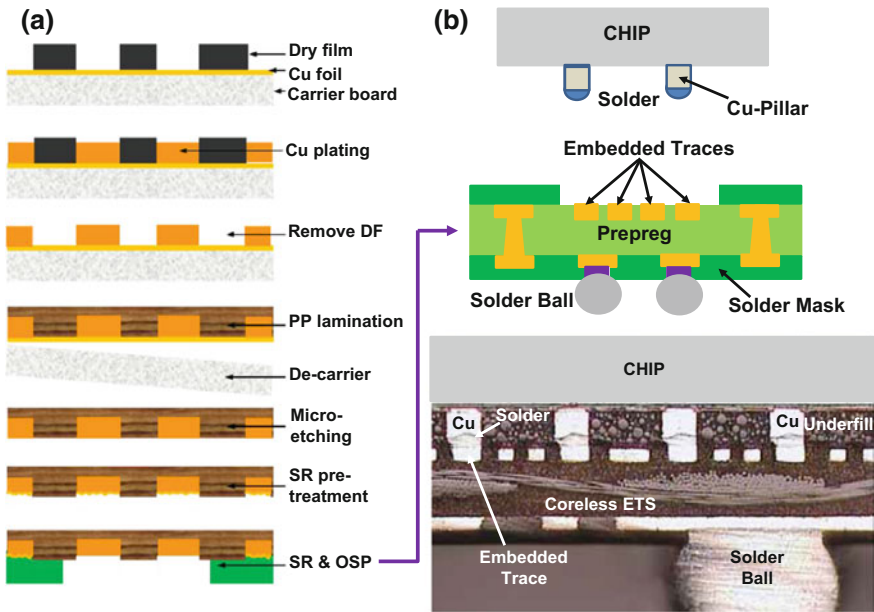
a Process flow for fabricating the ETS. b Flip chip with C2 bumps on ETS assembly
